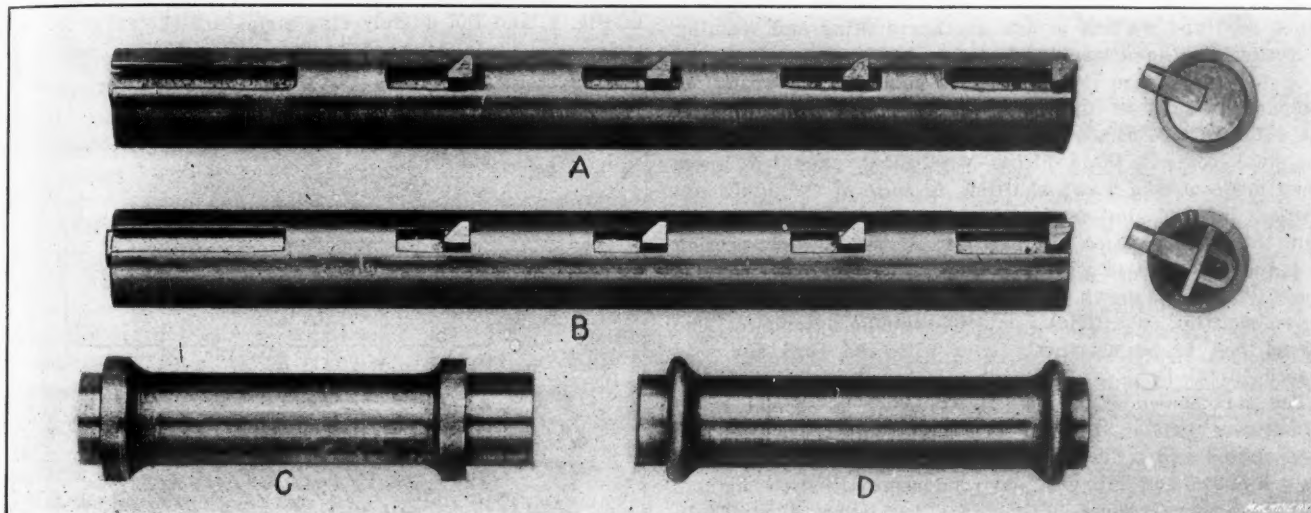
(A) Part machined from Bar; (B) Same Part produced from Sheet Steel in Dies; (C) Machined Spacer Tube; (D) Die-formed Spacer Tube
